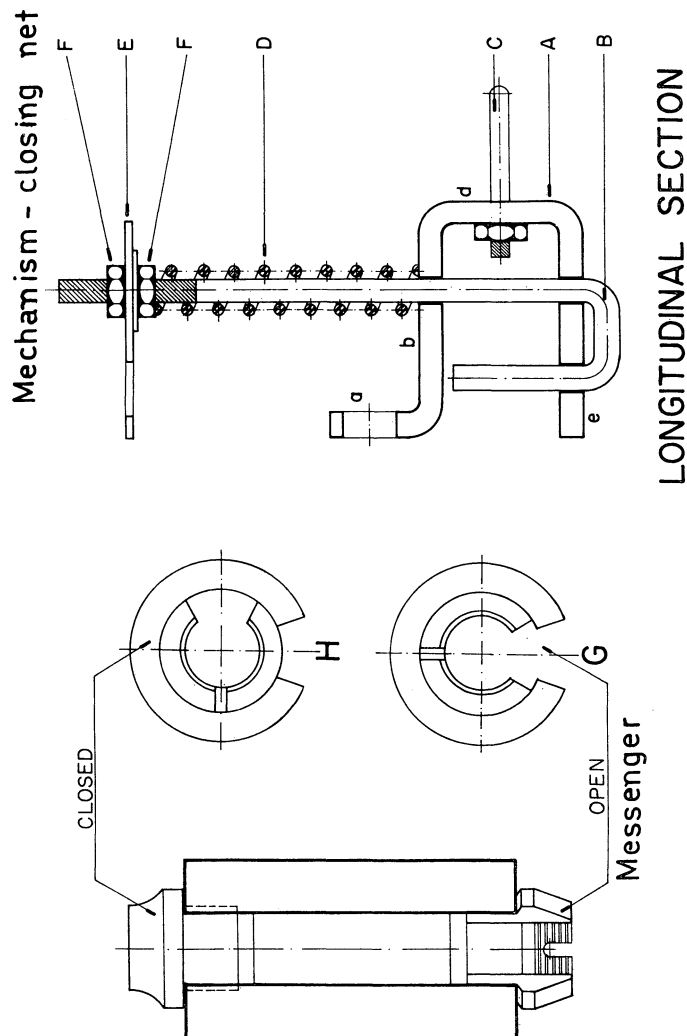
Messenger. "G" & "H" open and closed position of rings. Mechanism — closing net. "A" copper bar. "B" J-shaped pin. "C" shackle for securing throttle rope. "D" spring. "E" rectangular plate to receive messenger. "F" nuts to hold "E". "a" part where tow rope is secured through a hole "b" part where upper part of pin passes through a hole "d" part where shackle is fixed. "e" part where lower part of pin passes through two holes.
